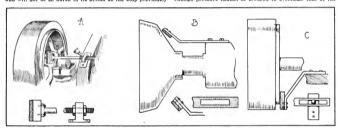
Practical Clutch Stops Designed to Overcome Inertia of Flywbeet: A, Adjustable Rod Attached to Cross Frame Member; B, Steel Spring Bolted to Transmission Casing; C, Method of Fastening to Frame,
